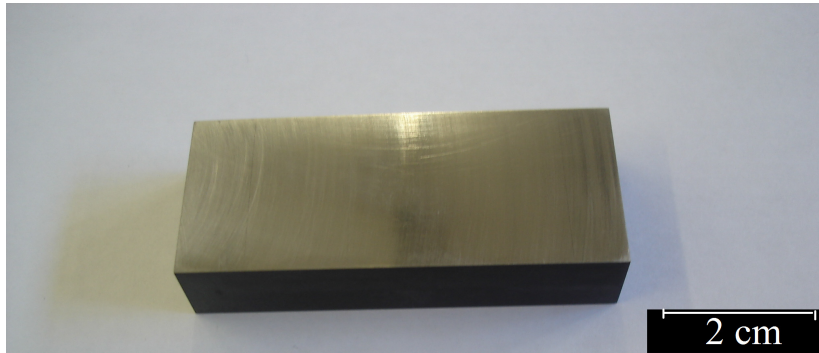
The test specimen for dry-sand rubber-wheel abrasion test before heat treatment.
